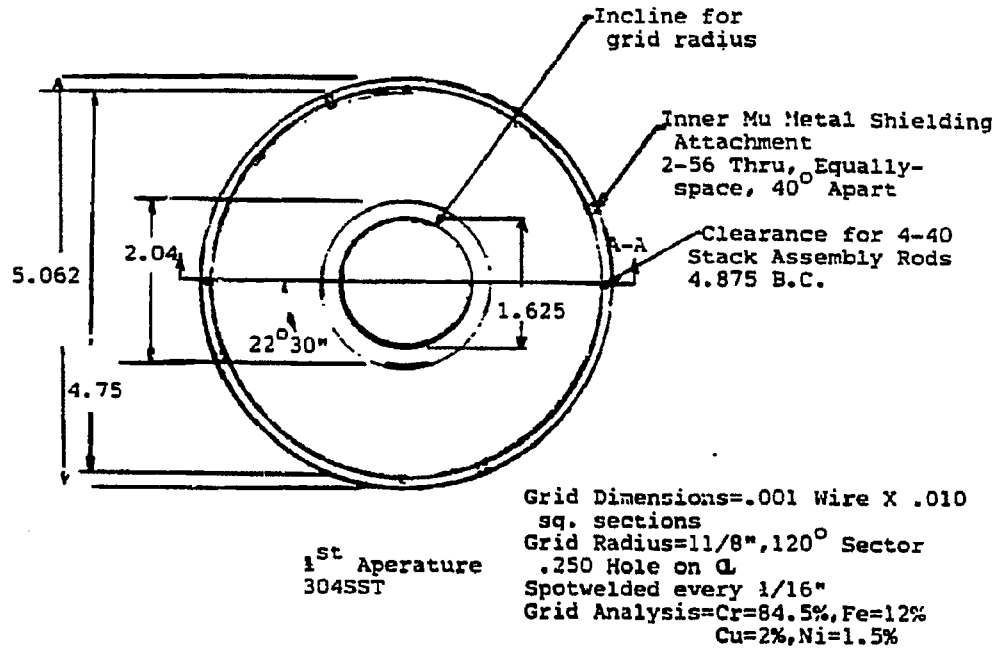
The cover shield for the CMA, with attachments for the stack assembly rods (see Fig. A.11), and inner Mu shield. The shield has a hemispherical grid spotwelded on the top (see Photograph A.50).
